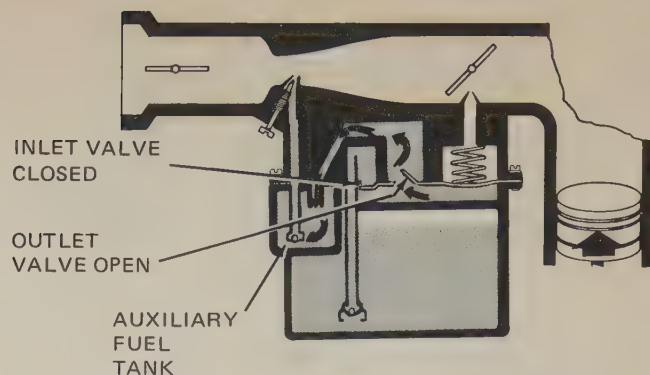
Schematic sectional view of a diaphragm-type suction-feed carburetor, showing the actions when the piston is moving up.
